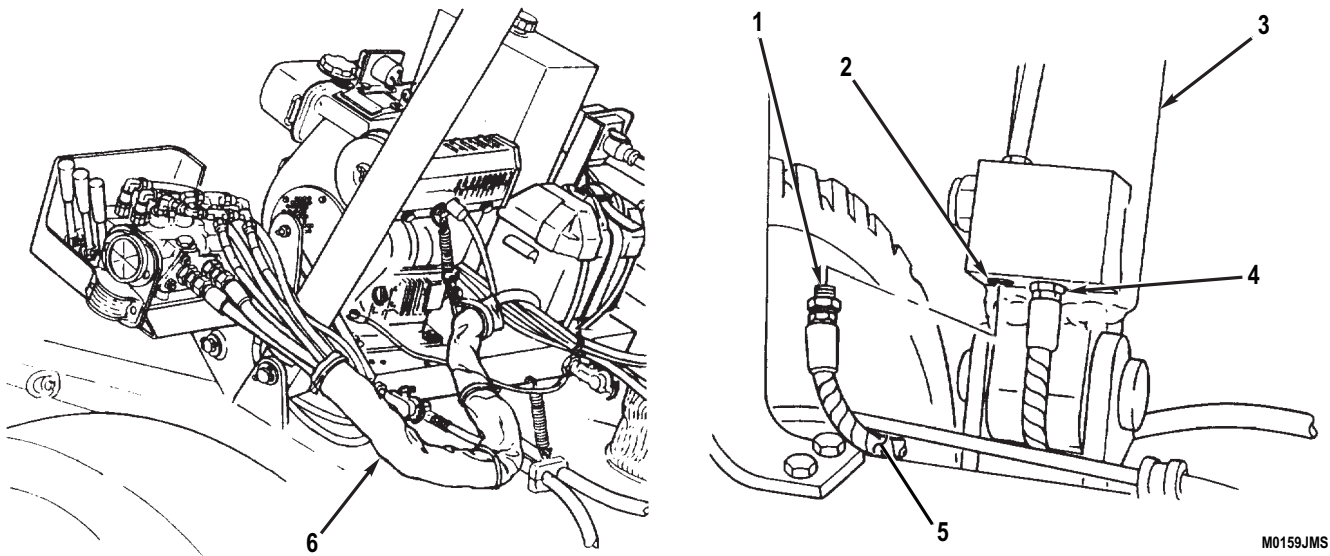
Hydraulic Control Valve-to-Hydraulic Lift Cylinder Hose Assemblies Removal.
